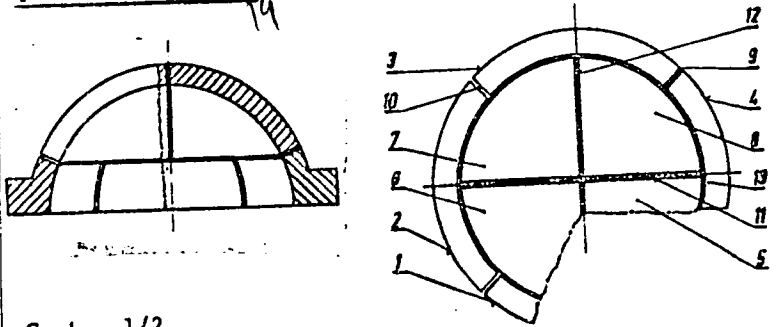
Schematic design of partition and welds of a pressure vessel end closure.
